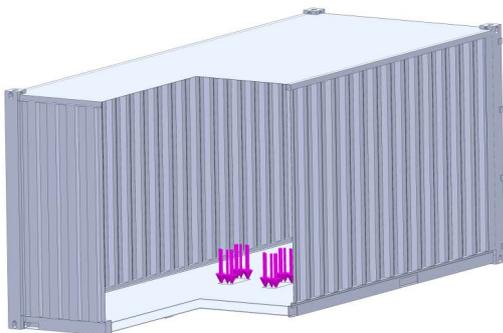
Container floor loading diagram when moving loading and unloading equipment on the floor
